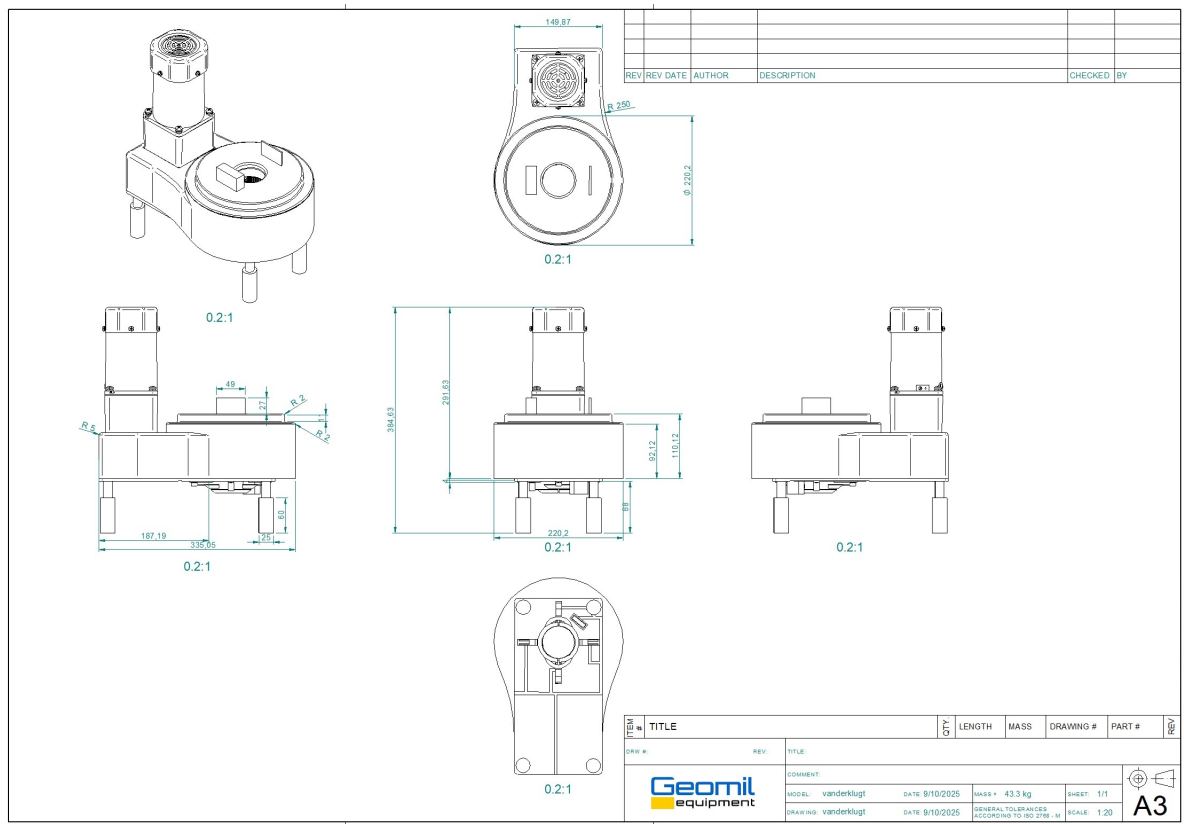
Technical Drawing Of The Front, Back And Sides Of The Raptor.
